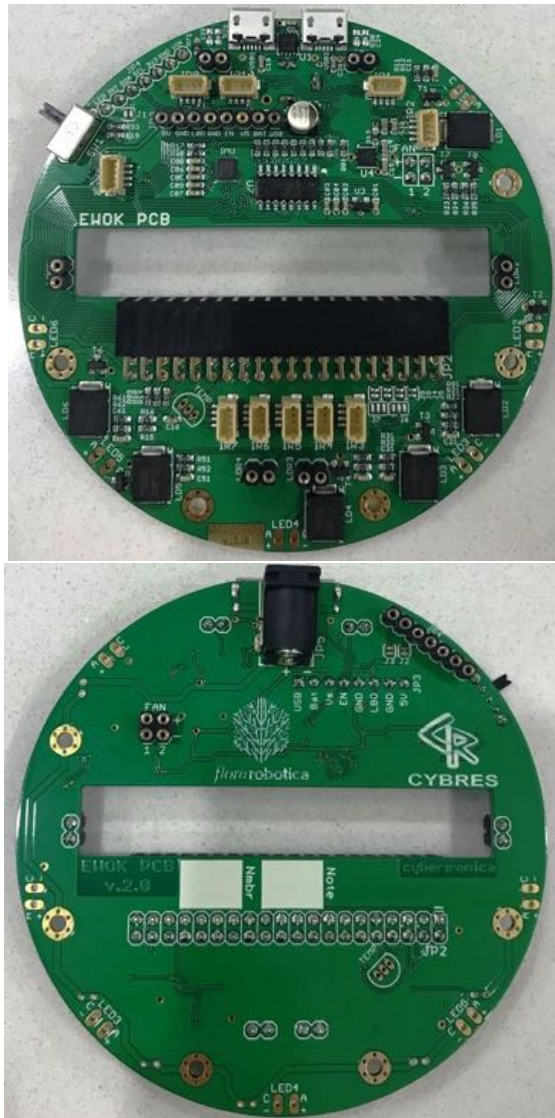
Custom PCB - the robotic node interface board (top and bottom view).
